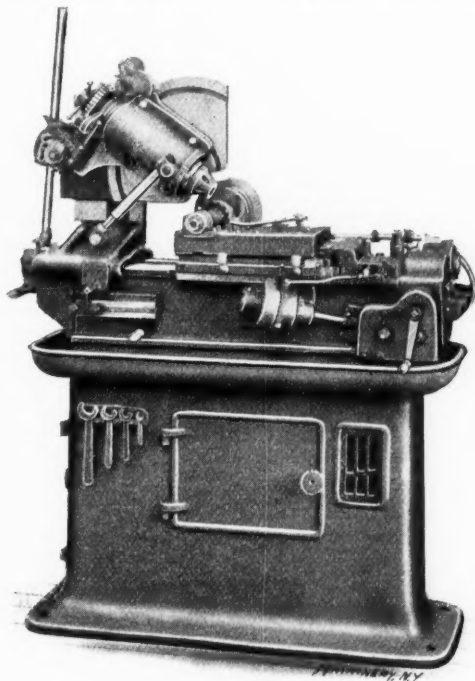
A Special Bevel Gear Cutting Machine in which provision is made for shifting the line of travel of the cutter; both sides of the teeth are finished automatically.
